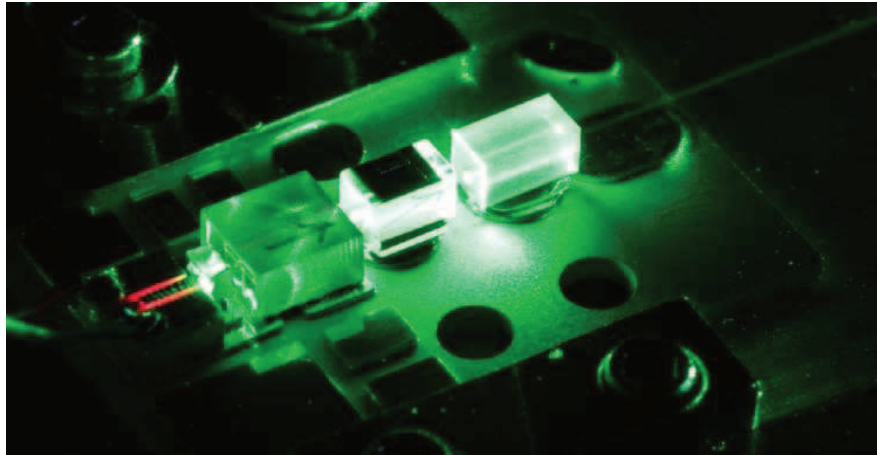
Exomars EQM assembled laser by solderjet bumping technology emitting at 532 nm after SHG.
